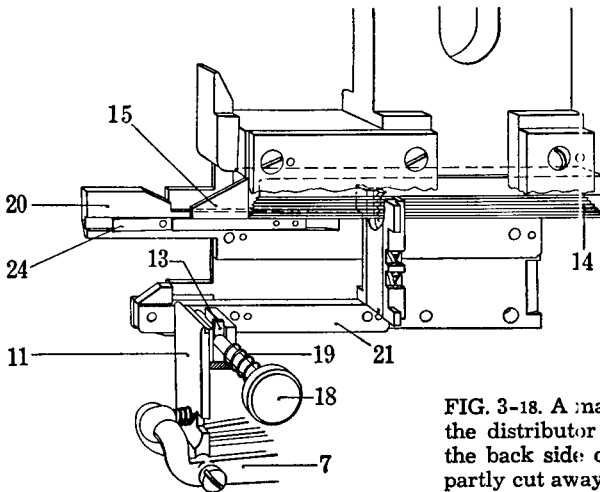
A matrix traversing the inside of the distributor box along the toothed bar, the back side of the distributor box being partly cut away for purposes of illustration. 13 is the font distinguisher. 14 is the distributor box bar, which has in its end the bar point 15.
